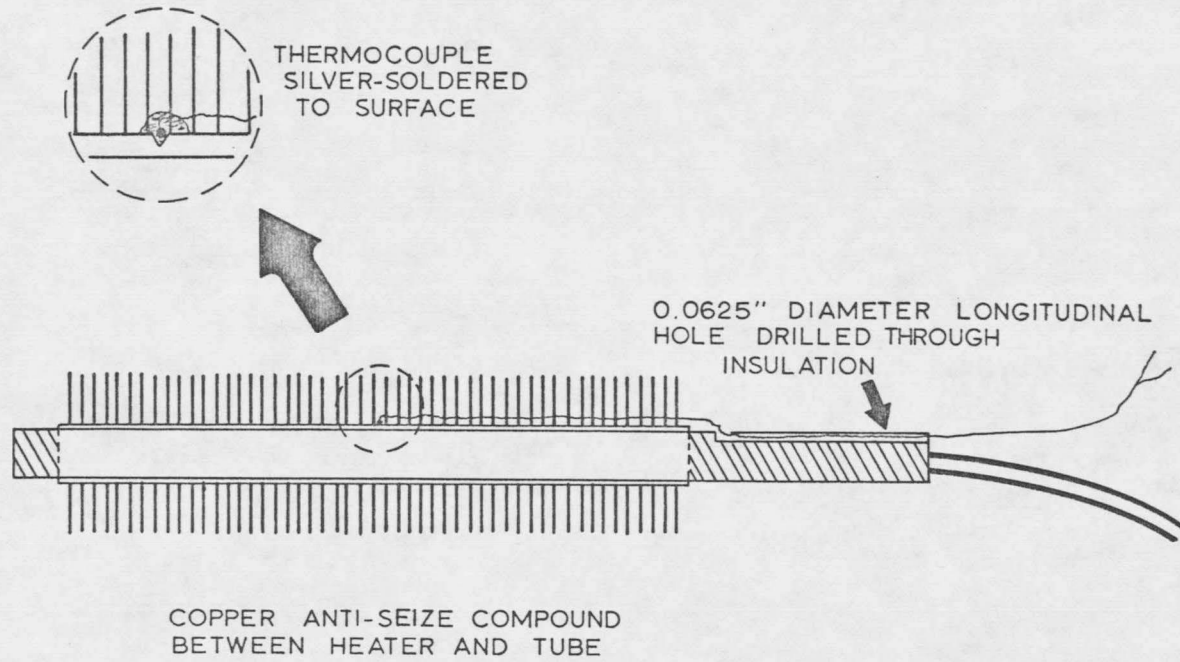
DETAILS OF HEATER AND TUBE ASSEMBLY
